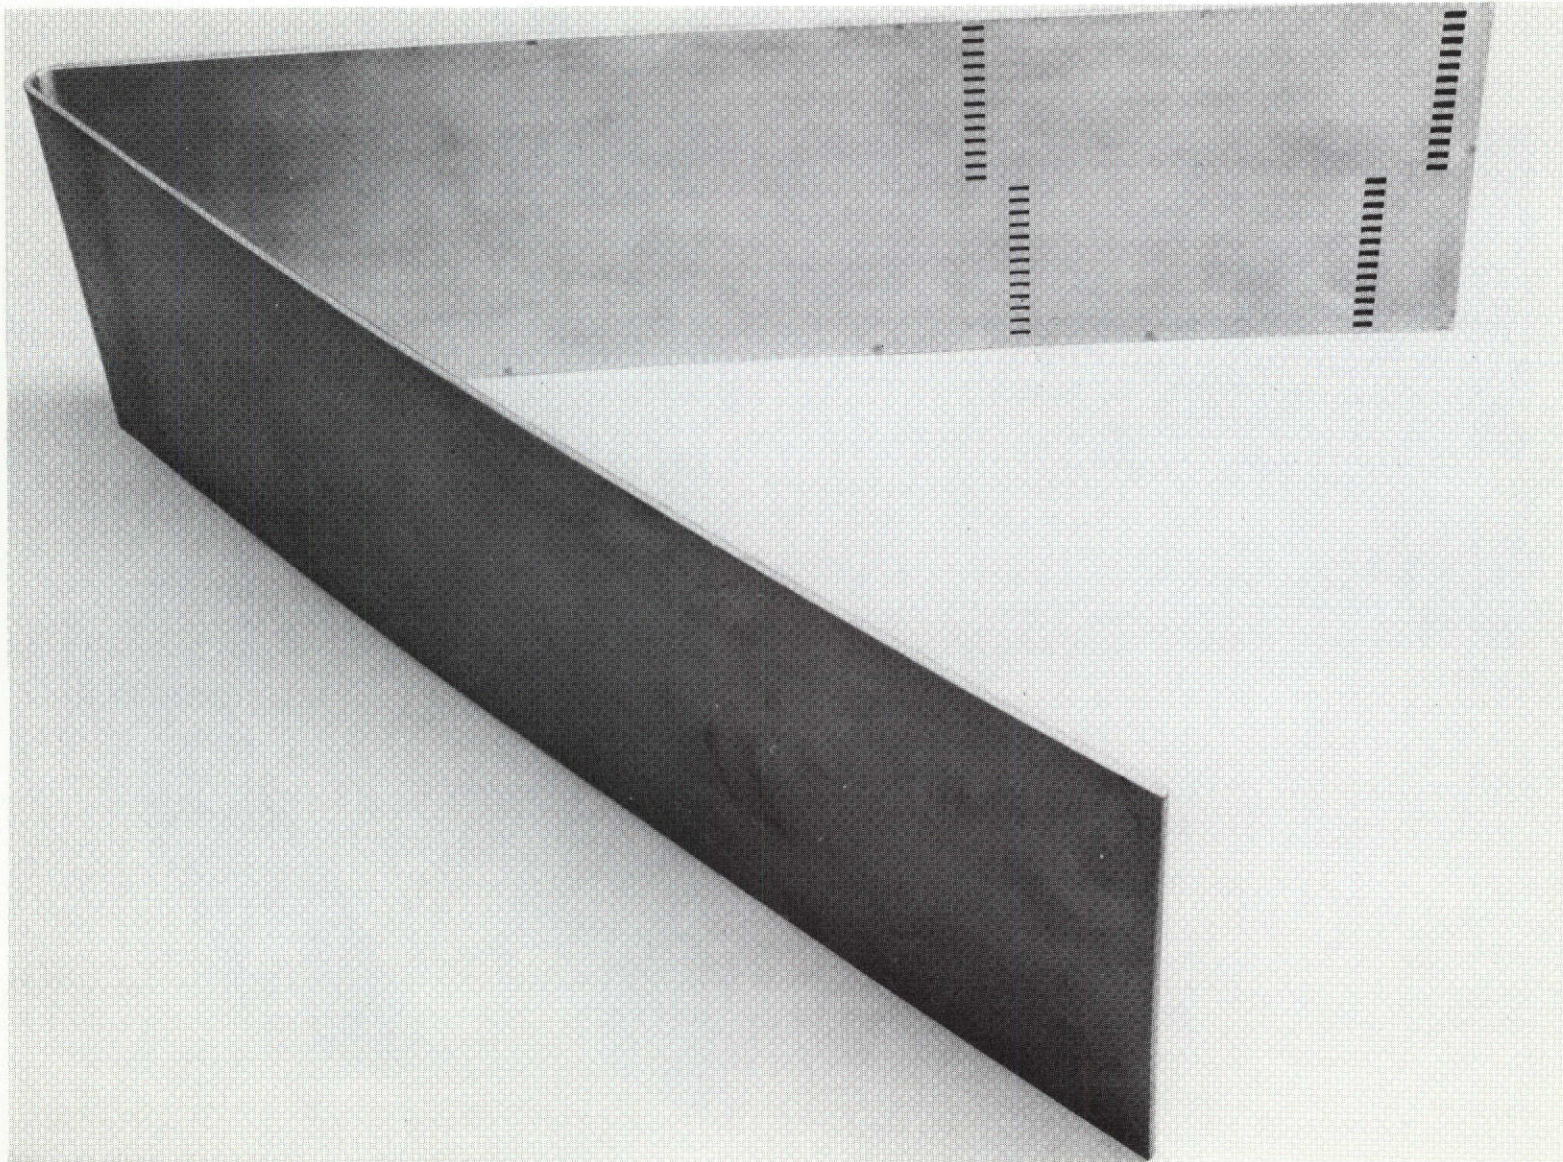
depicts the brazed assembly after the initial or partial forming operation, and Fig. 69 shows the partially formed panel assembly in the bending fixture. Following this operation, the panel assembly was solution-annealed in a hydrogen atmosphere furnace to relieve any strains induced during the initial form operation.
